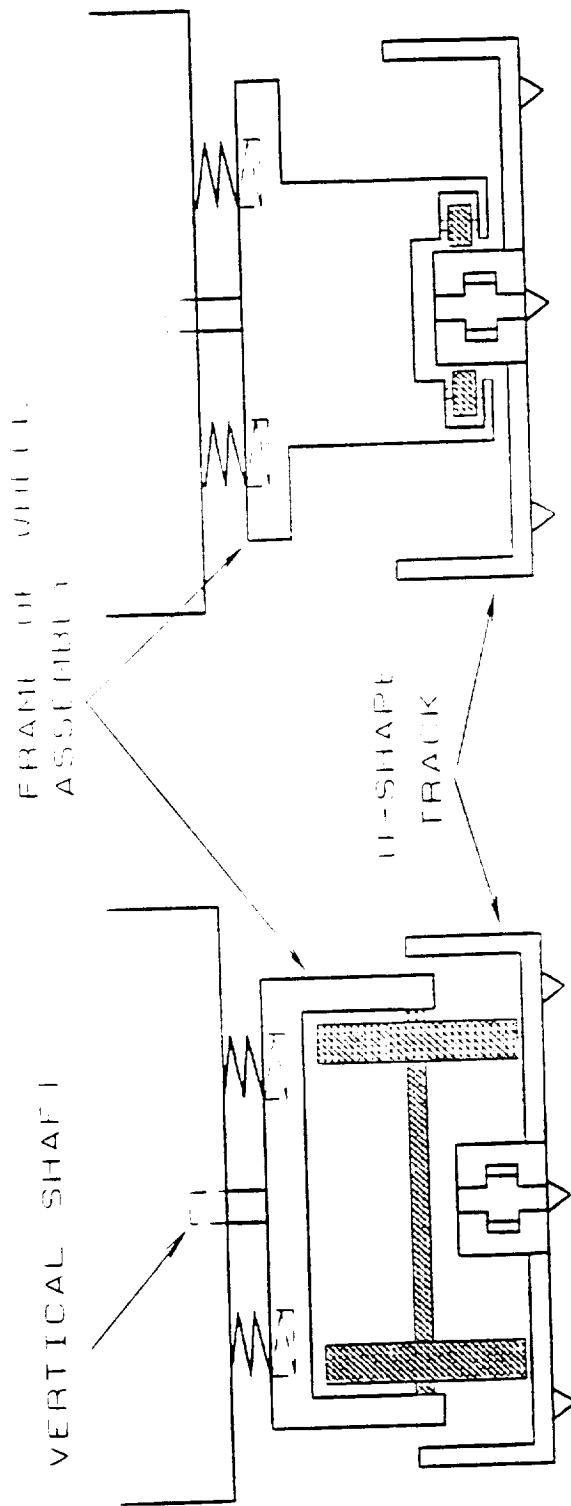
SIDE VIEW OF A SINGLE WHEEL ASSEMBLY
